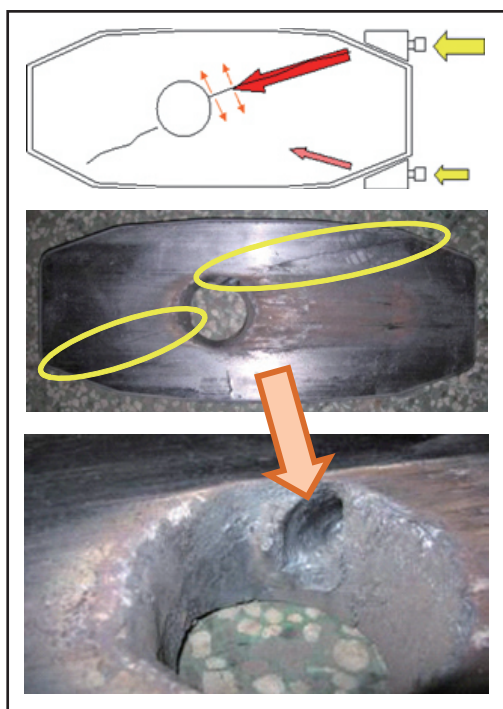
Crack and damage of plate brick in conventional slide gate system.
